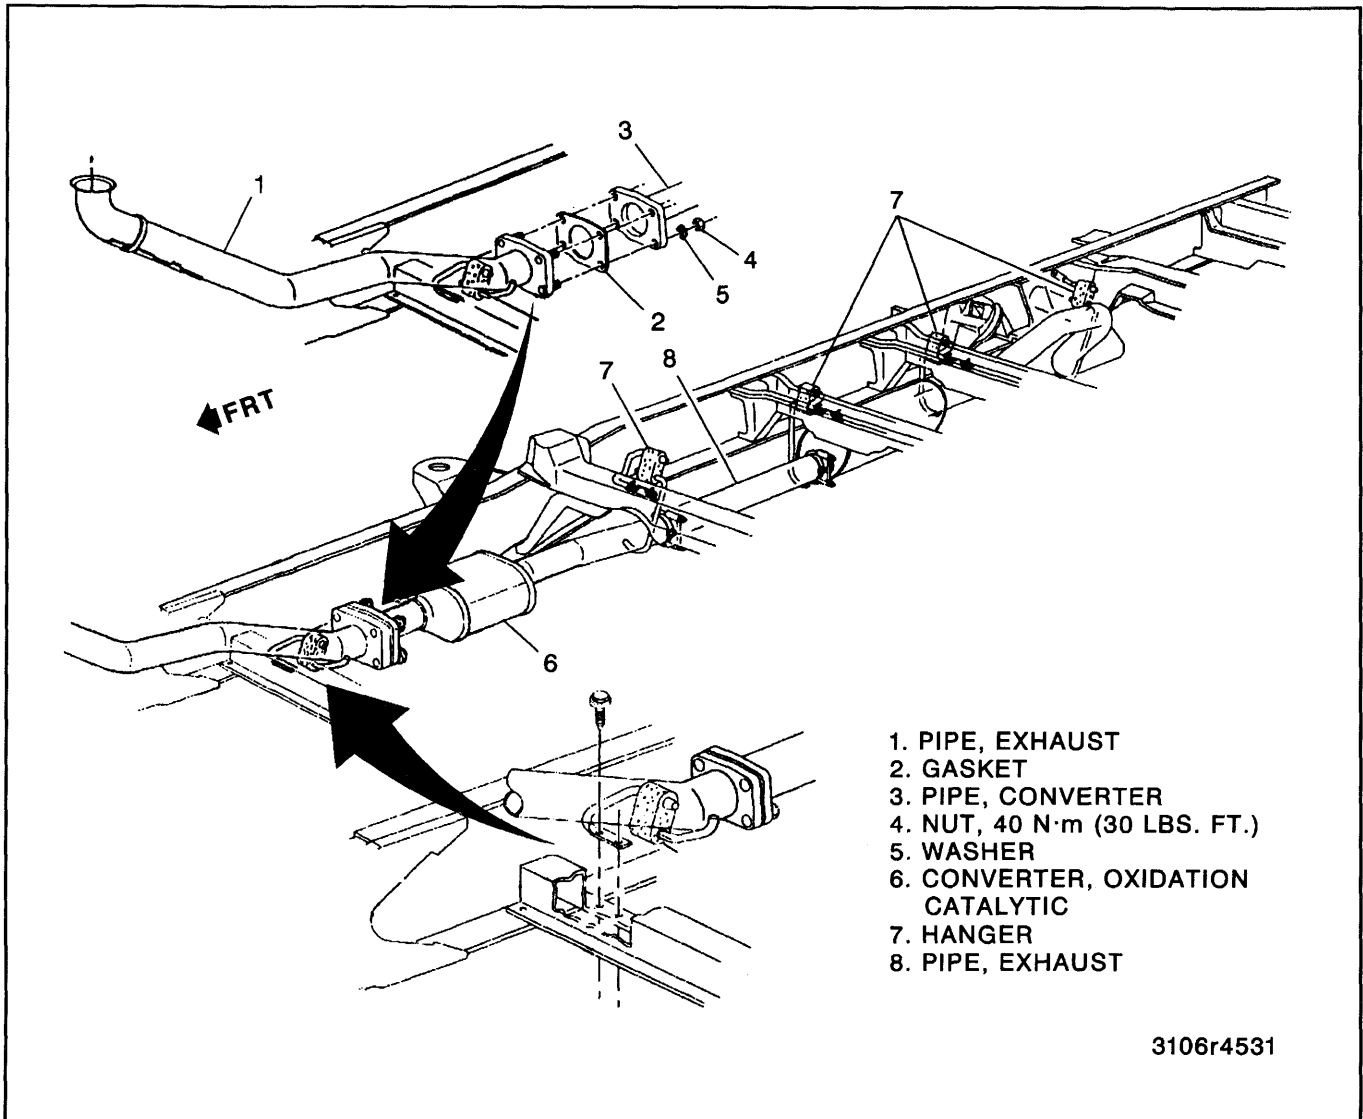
Exhaust System - 6.5L Sierra 3500 HD Chassis Cab (L65, VIN F)
